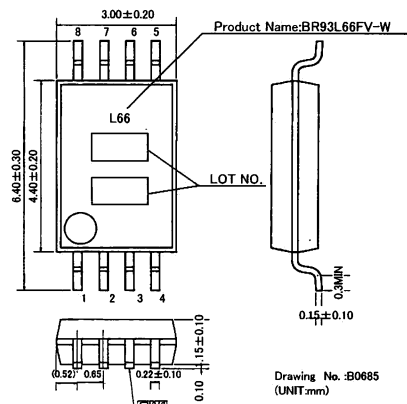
(g) PHYSICAL DIMENSION SSOP-B8 (BR93L66FV-W)
